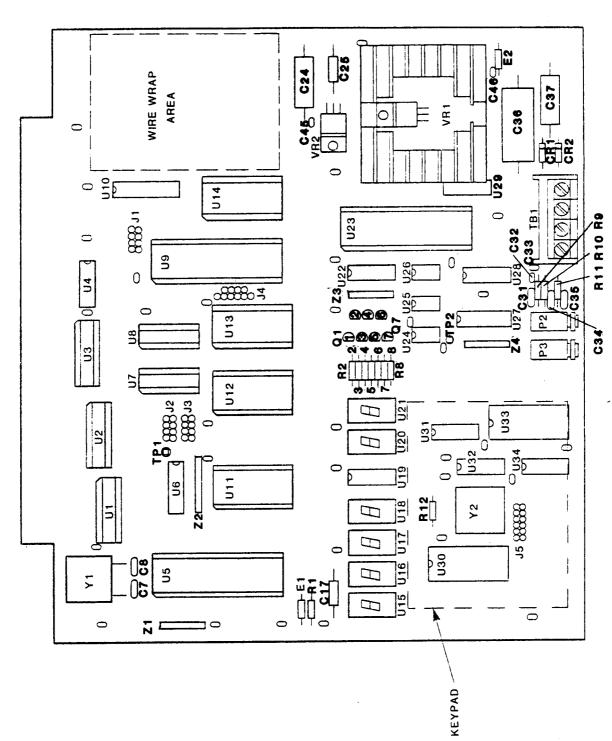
BOARD OUTLINE AND COMPONENT LAYOUT
